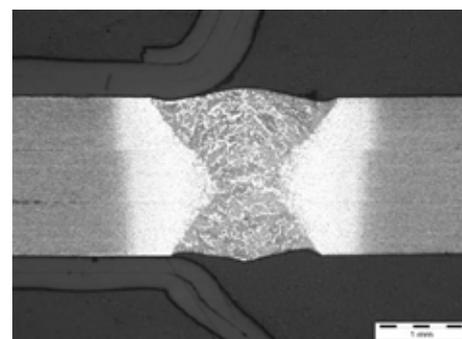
Laser welded 3 ply titanium skin lap joint (Images courtesy of TWI and IPG Photonics) - laser seam stepper welding.
